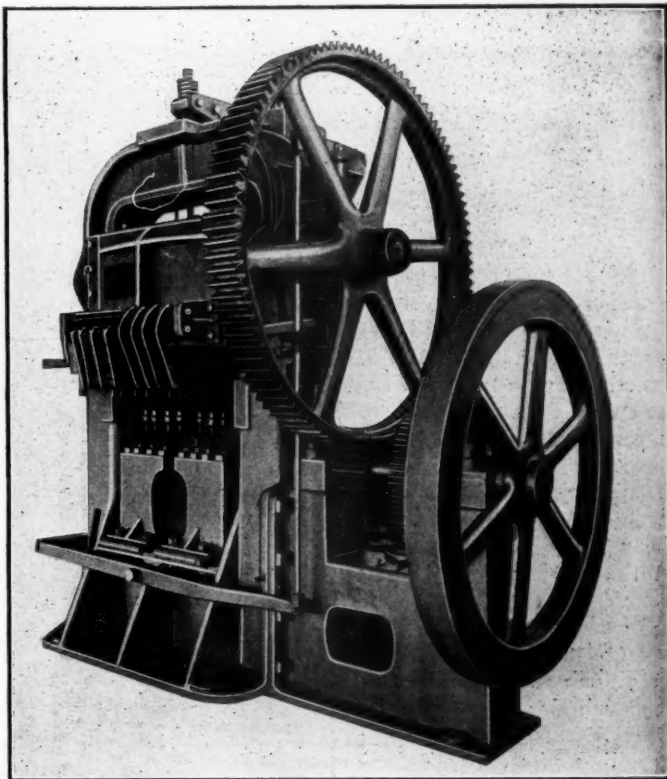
Punch Equipped with Tools for Multiple Punching of Plates
